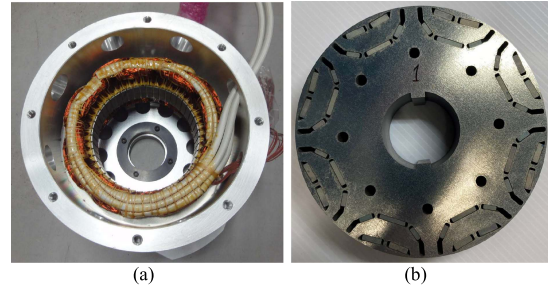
Photographs of prototype. (a) Stator core. (b) Rotor core.
